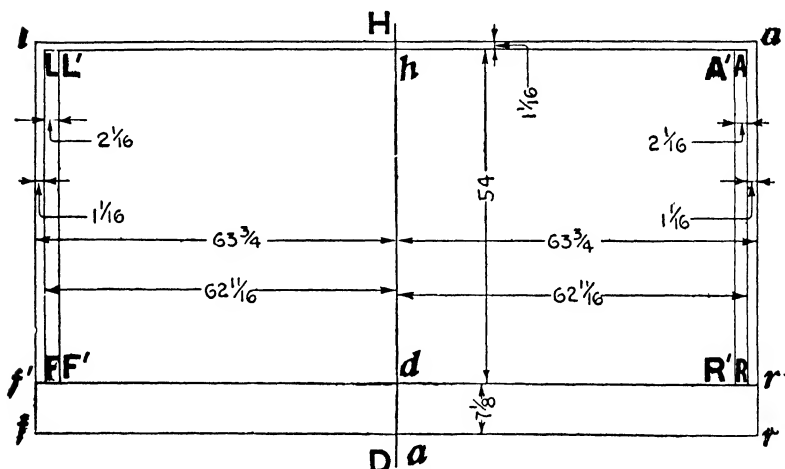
,722.—Lines of the shell layout with dimensions illustrating the spacing of rivets.
